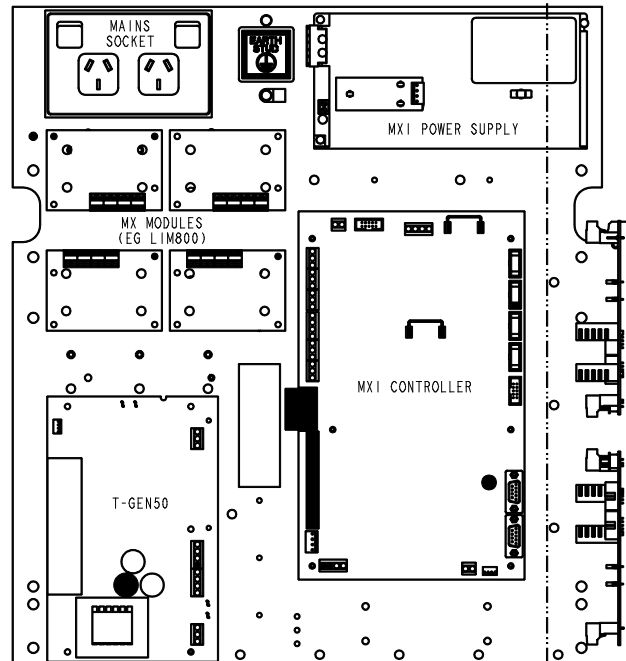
Internal Layout of *MX1* 15U Cabinet Gearplate showing T-GEN 50
